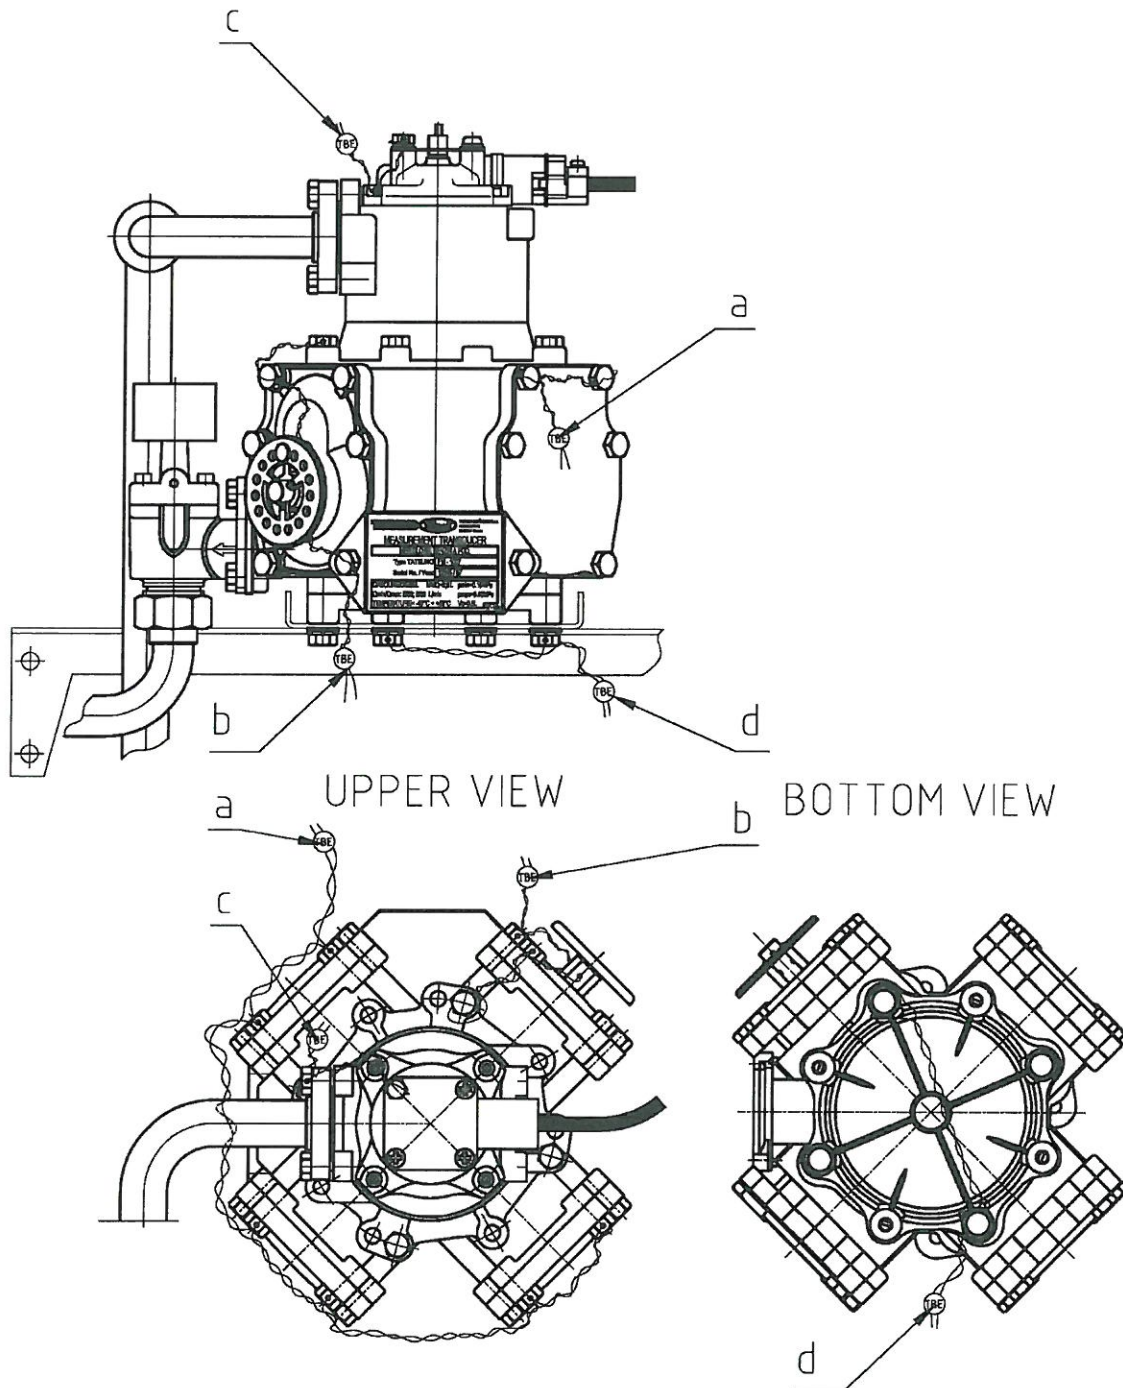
The sealing of SHARK BMP 2xxx.S/WSE WSE dispenser
